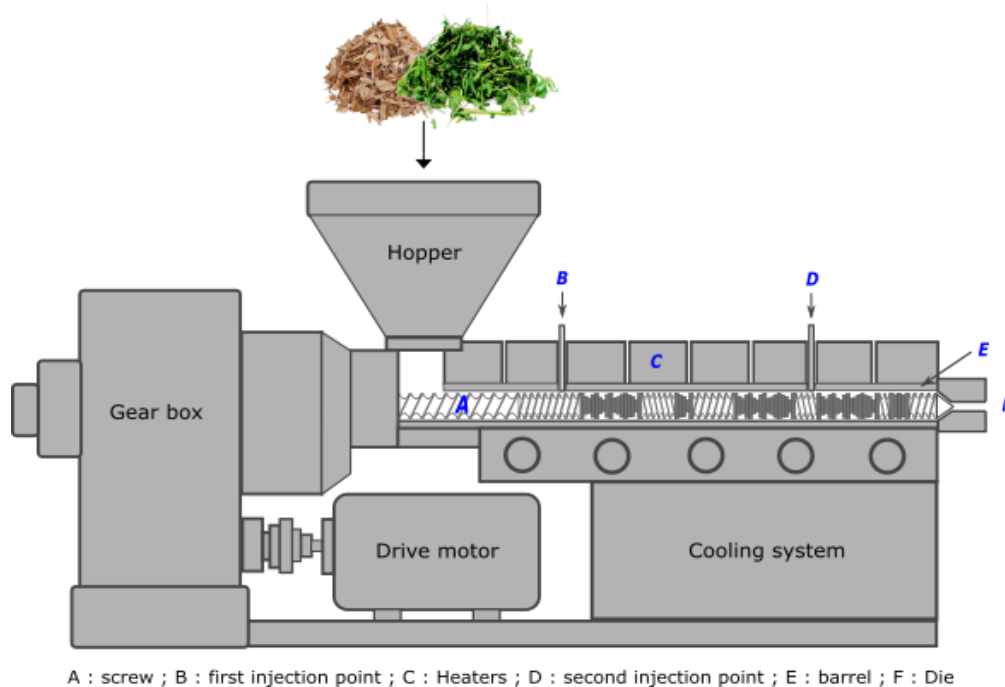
Illustration of a twin-screw extruder with the main parts (screws, injection points, heaters, barrel and die).
